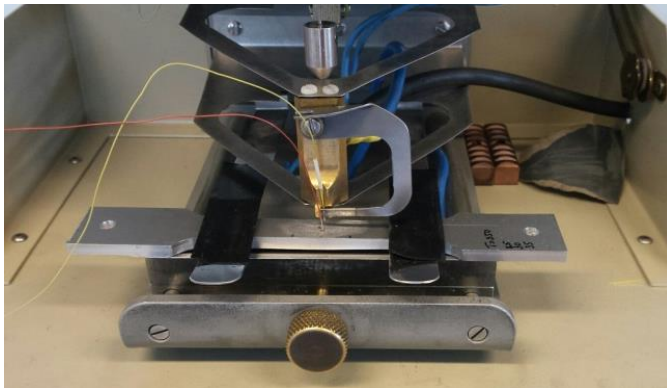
Spot welding of a thermocouple at the middle of the specimen
